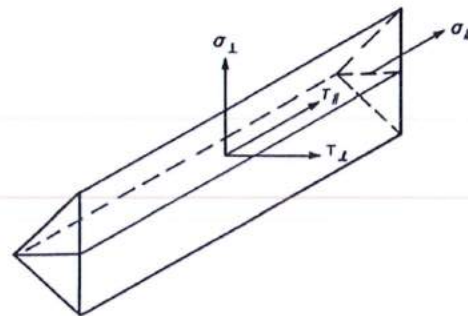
Stresses on the throat section of a fillet weld
